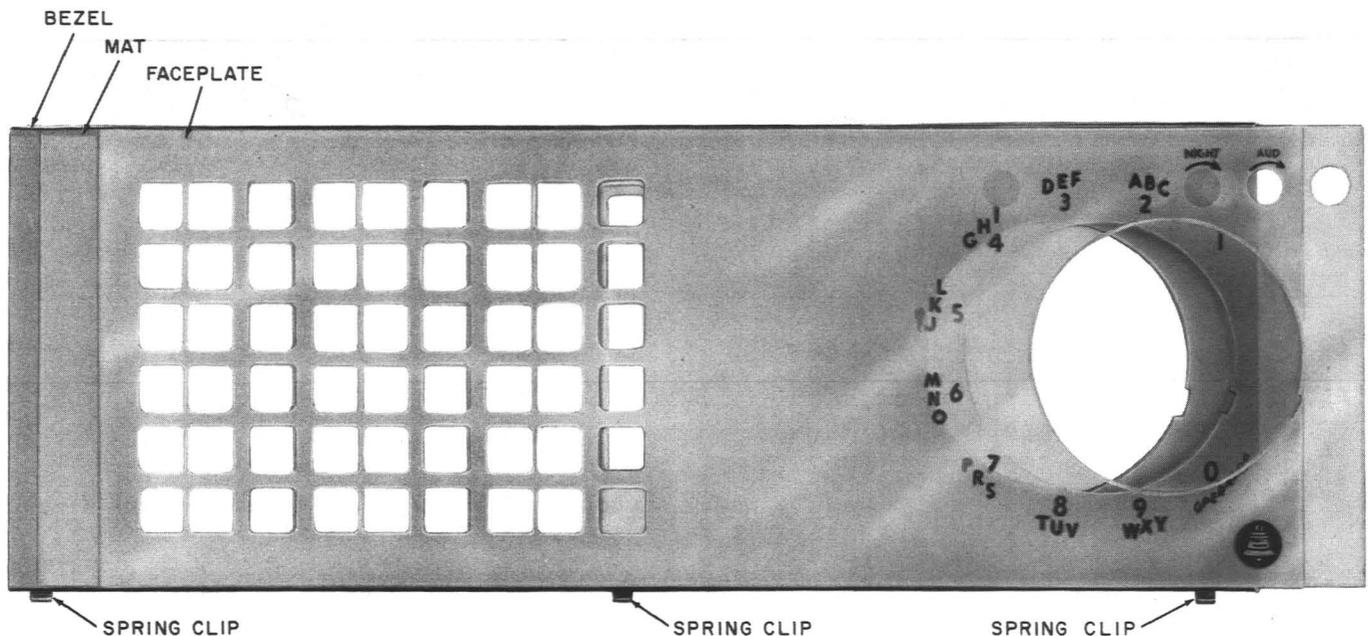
Typical Faceplate, Mat, and Bezel Unit
